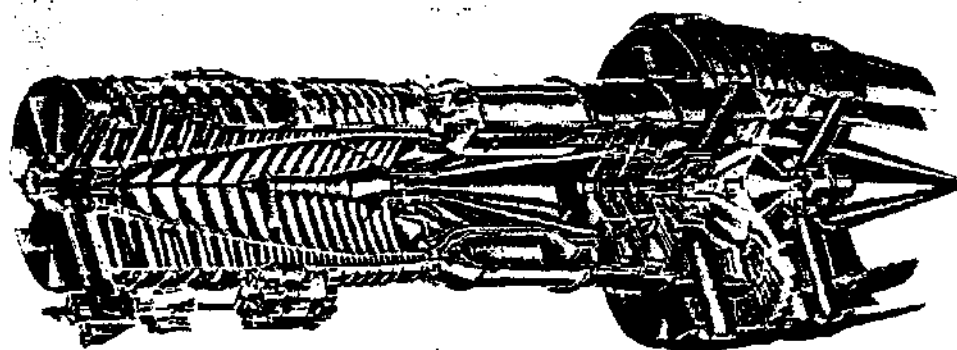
Cutaway Drawing of a GE CJ805-23 Aft-Turbofan Engine
